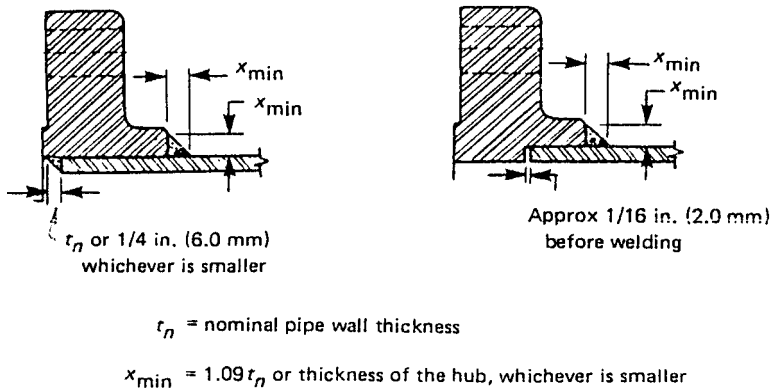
Slip-on and socket welding flange welds. (ASME B31.1, 1995 ed.)
